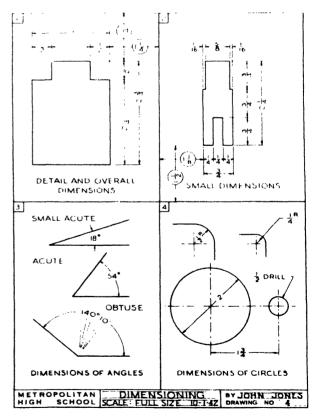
INDICATING DIMENSIONS (PROBLEMS 1, 2, 3, AND 4)
